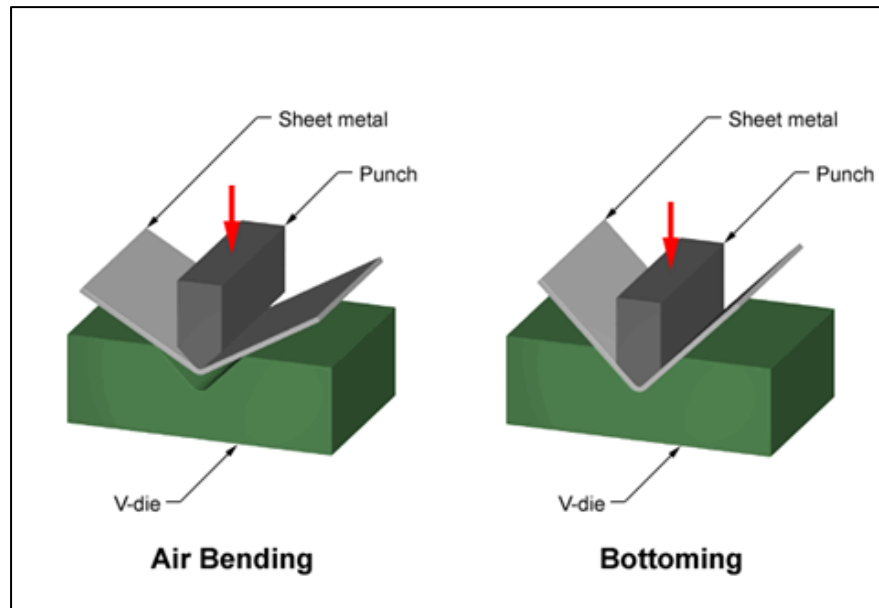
Air bending (forming) and bottoming forming ^[7]
